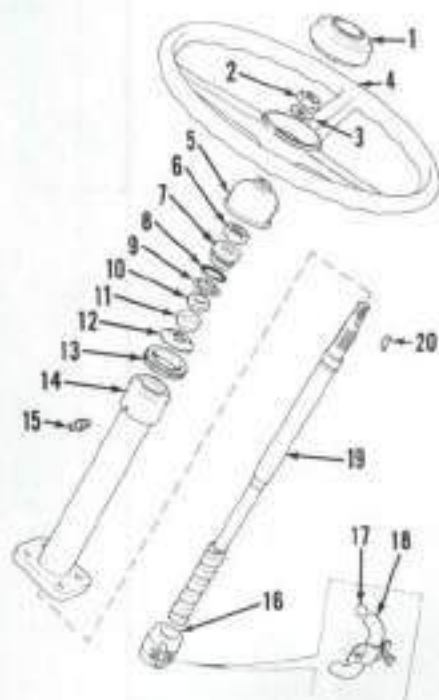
Exploded view of steering column and related parts for 1190 models equipped with manual steering.
